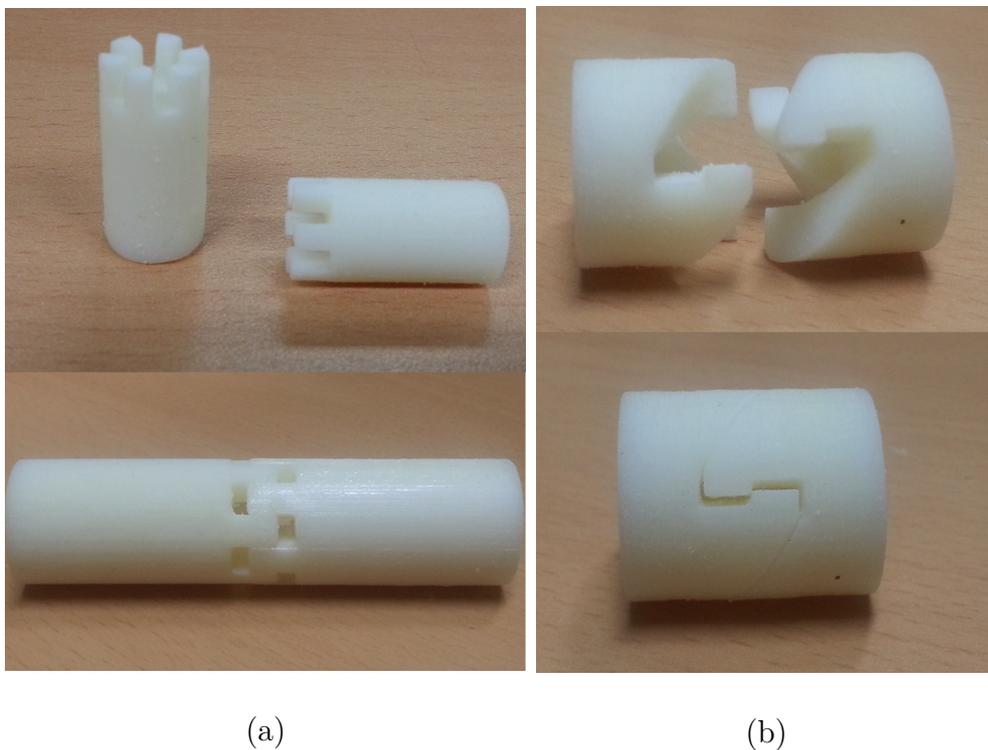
3D Printed couplings: (a) symmetric regular and (b) gear-like coupling.
